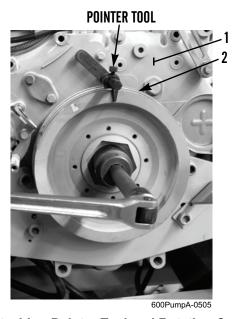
Attaching Pointer Tool and Rotating Crankshaft.
